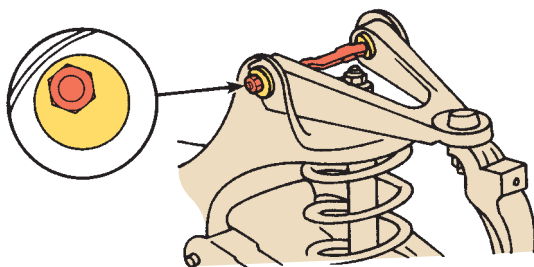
Eccentric bolt and cam, shown on an upper control arm.
